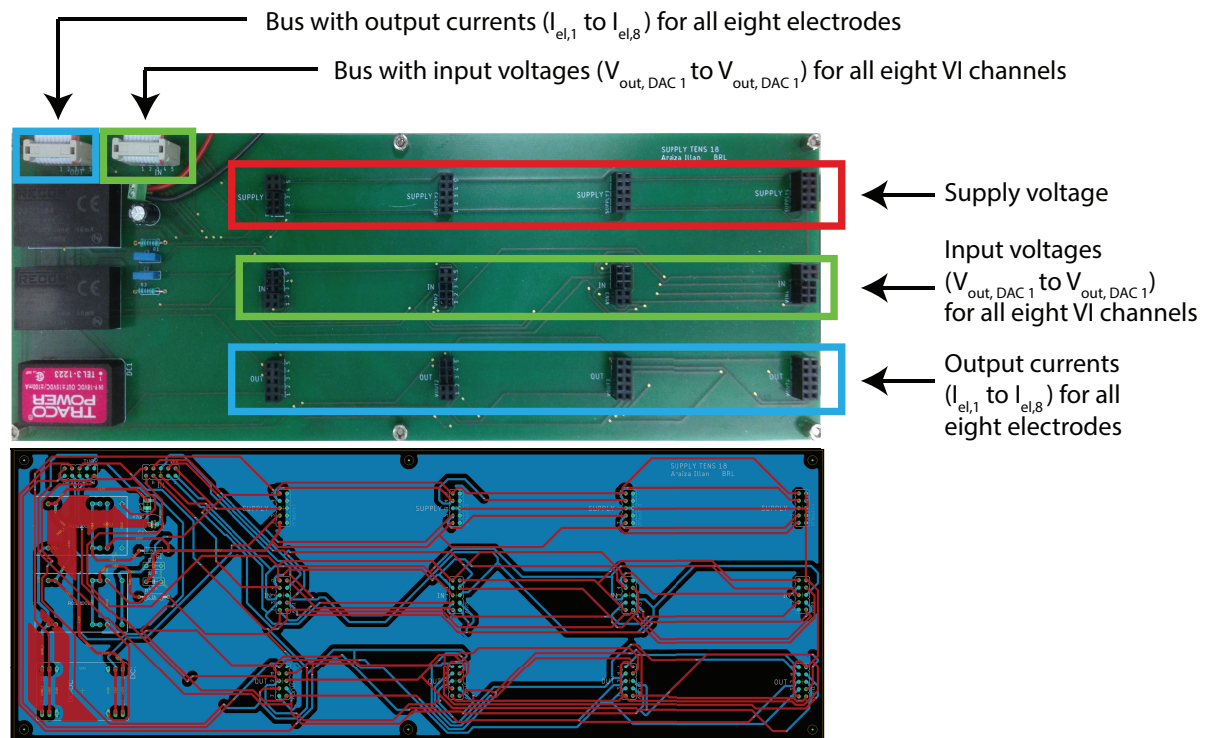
Power supply board for the VI converter. The implemented board is shown at the top and the circuit board drawing at the bottom.
